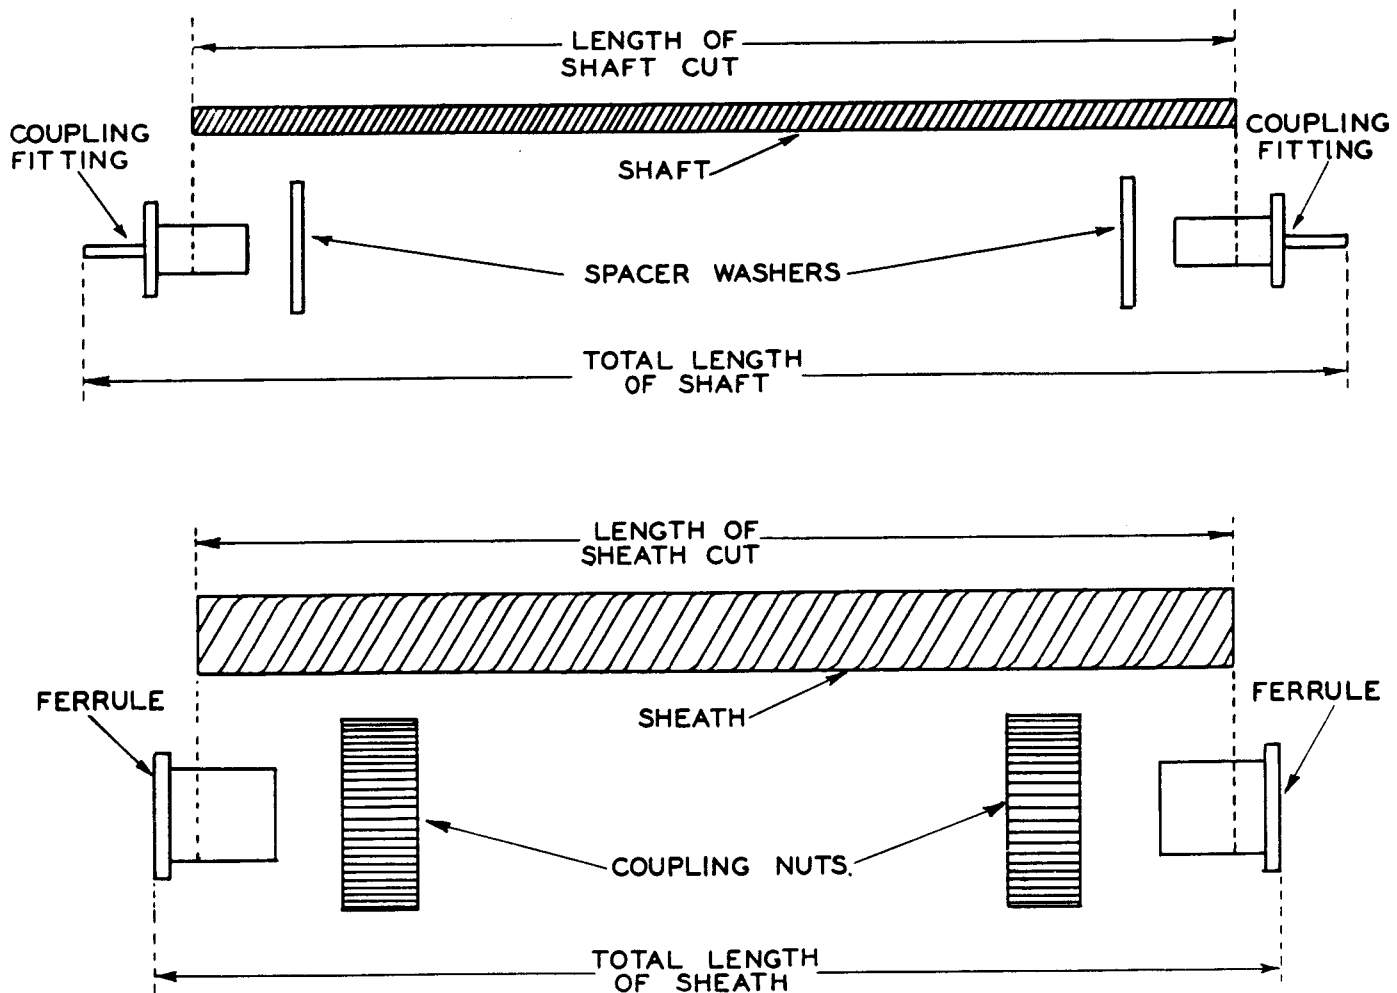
PROCEDURE FOR FABRICATING REMOTE TUNING CABLES
